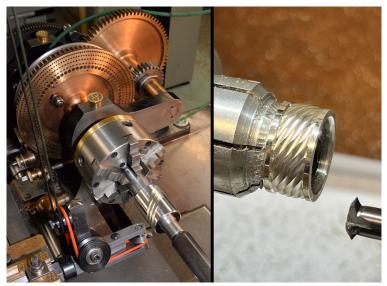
which shows both a small vessel and a finger ring cut in a spiral pattern
